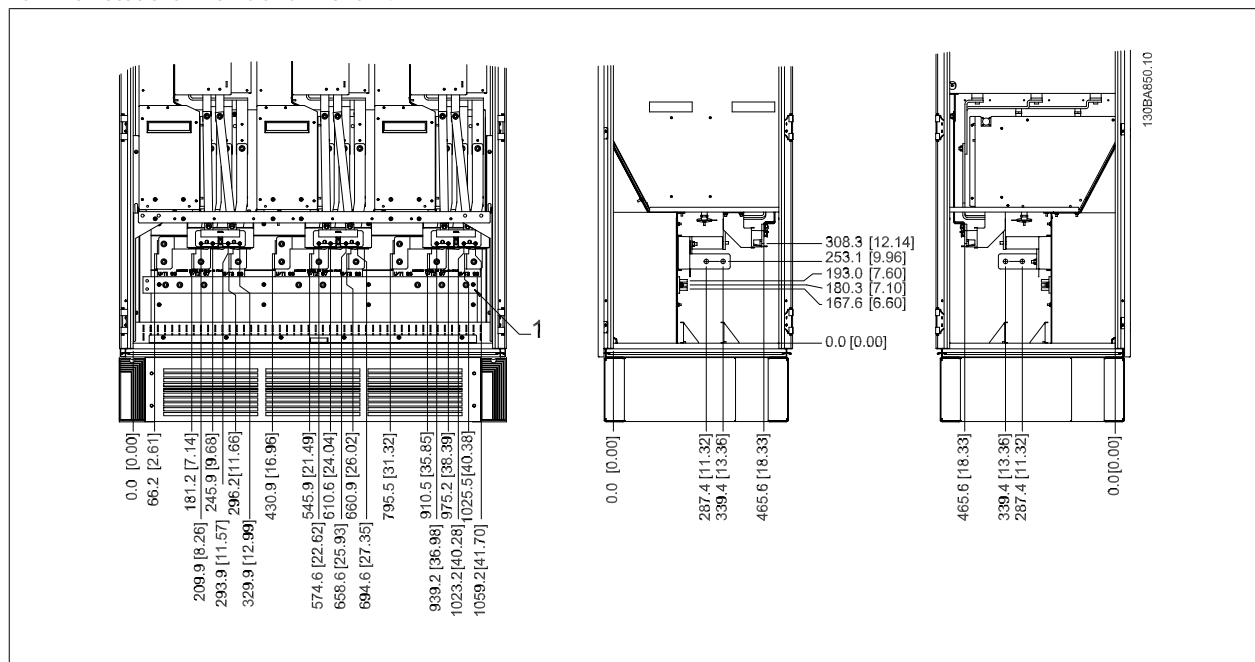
Terminal locations - Inverter Cabinet - F2 and F4 (front, left and right side view)
